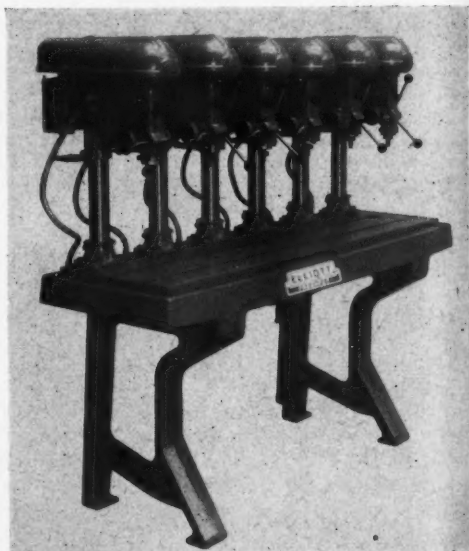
One of the new Elliott Progress multi-spindle drilling machines
